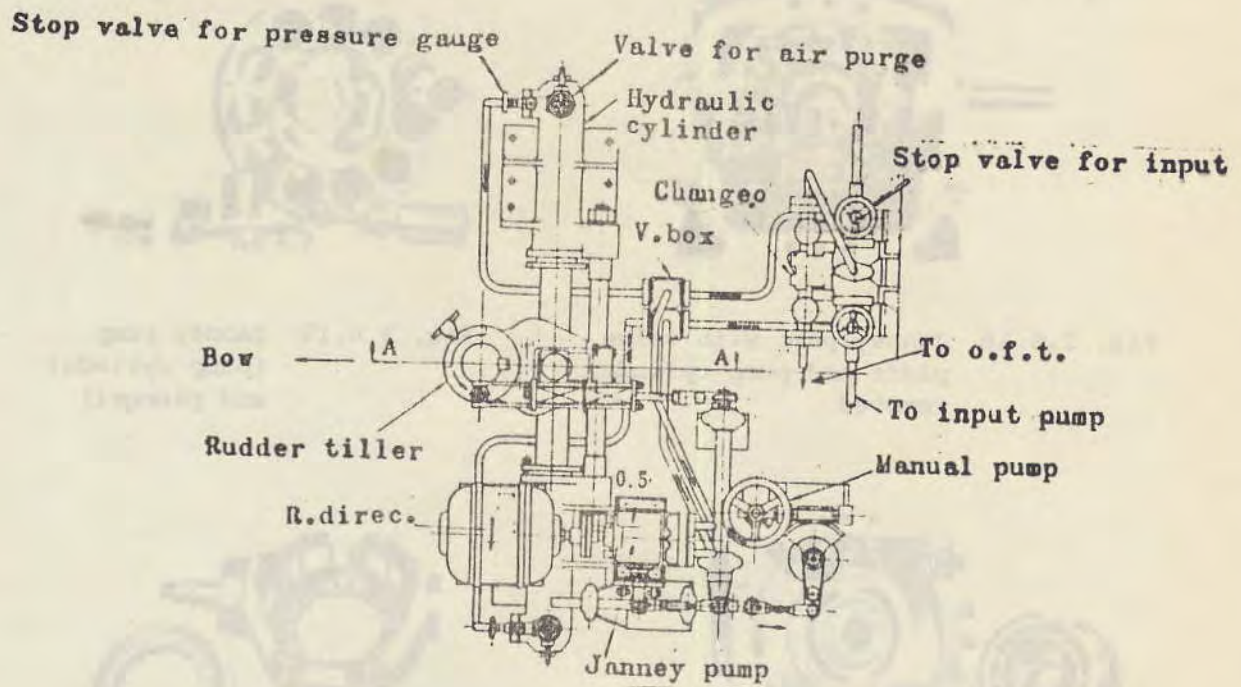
Outward form of William Janney type electro-hydraulic rudder gear
